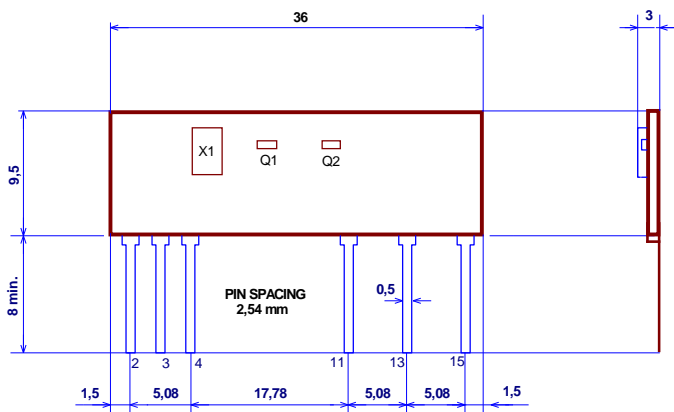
BT27 PHYSICAL DIMENSIONS.
